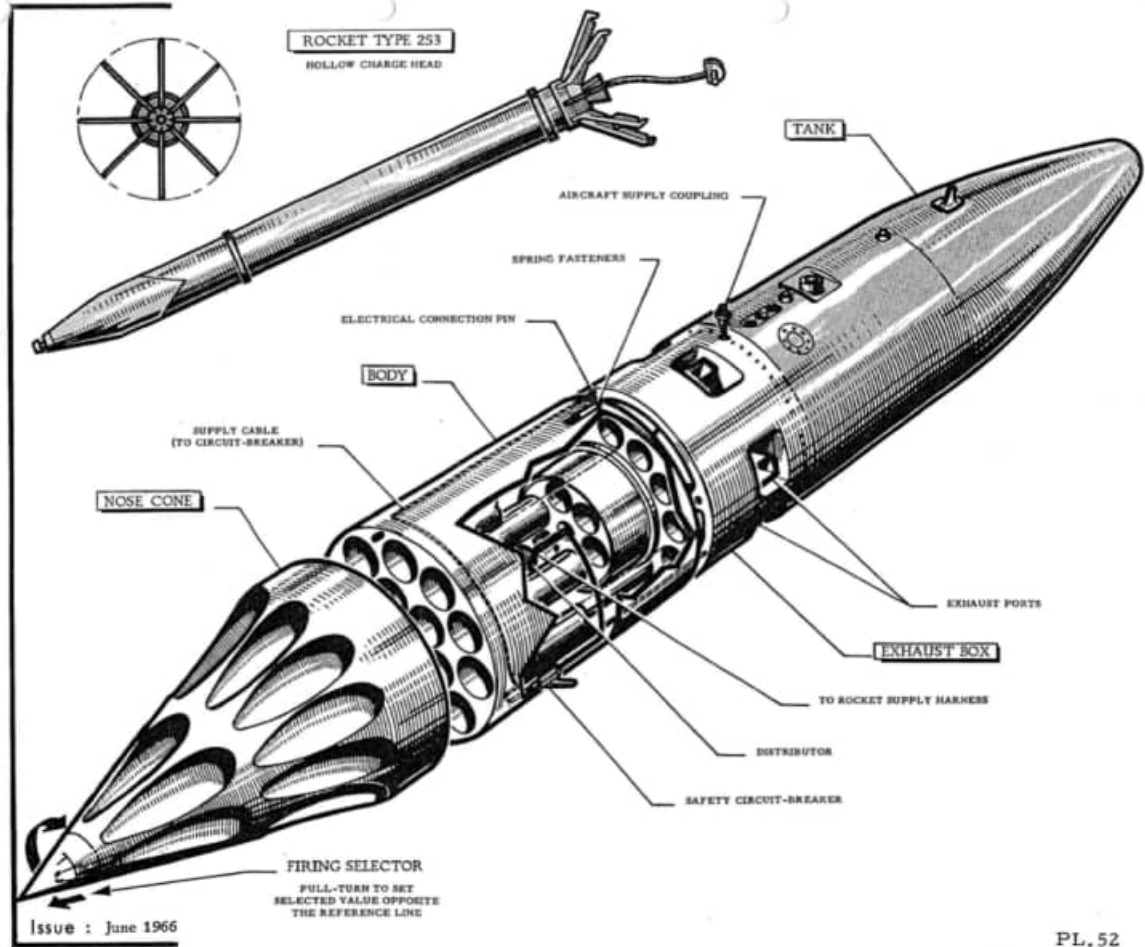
Technical drawing of the JL 100 combined fuel tank (250 liter) / rocket pod.
